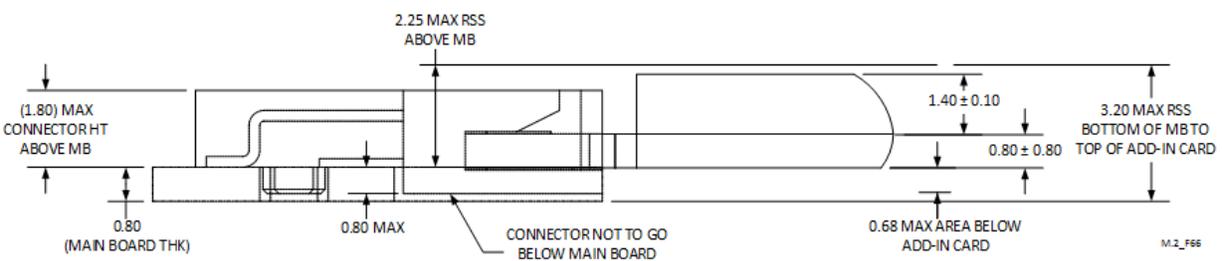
Stack-up Mid-mount (In-line) Single-sided (S3) Add-in Card for 1.5 Maximum Component Height
